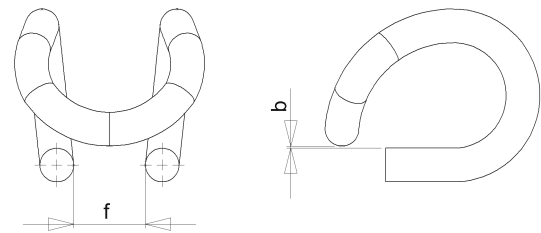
Dimensions “b” and “f” of an SB4-type spring clip, measured during assembly strength tests [authors’ own work based on [2, 21]]
